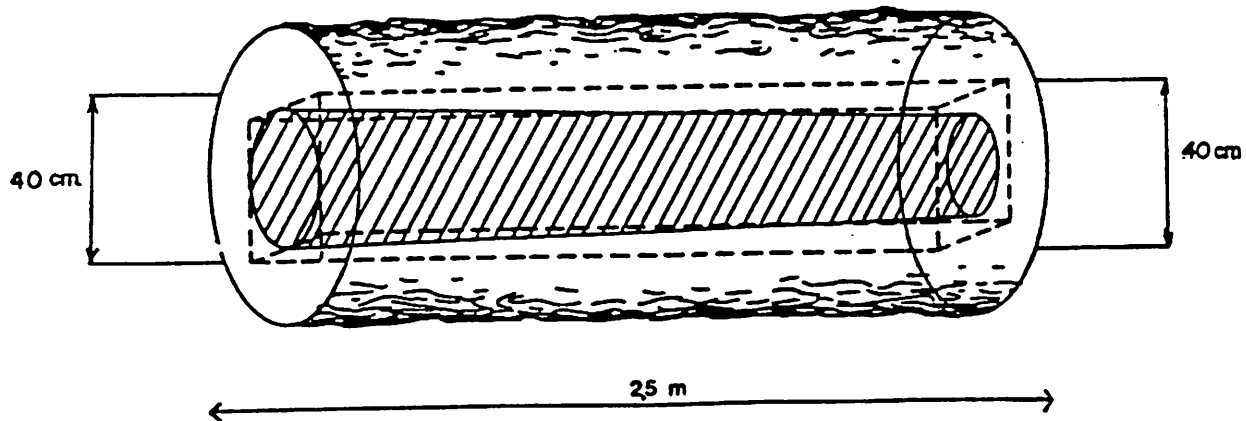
BEAMING OUT SOLID DEFECTS
